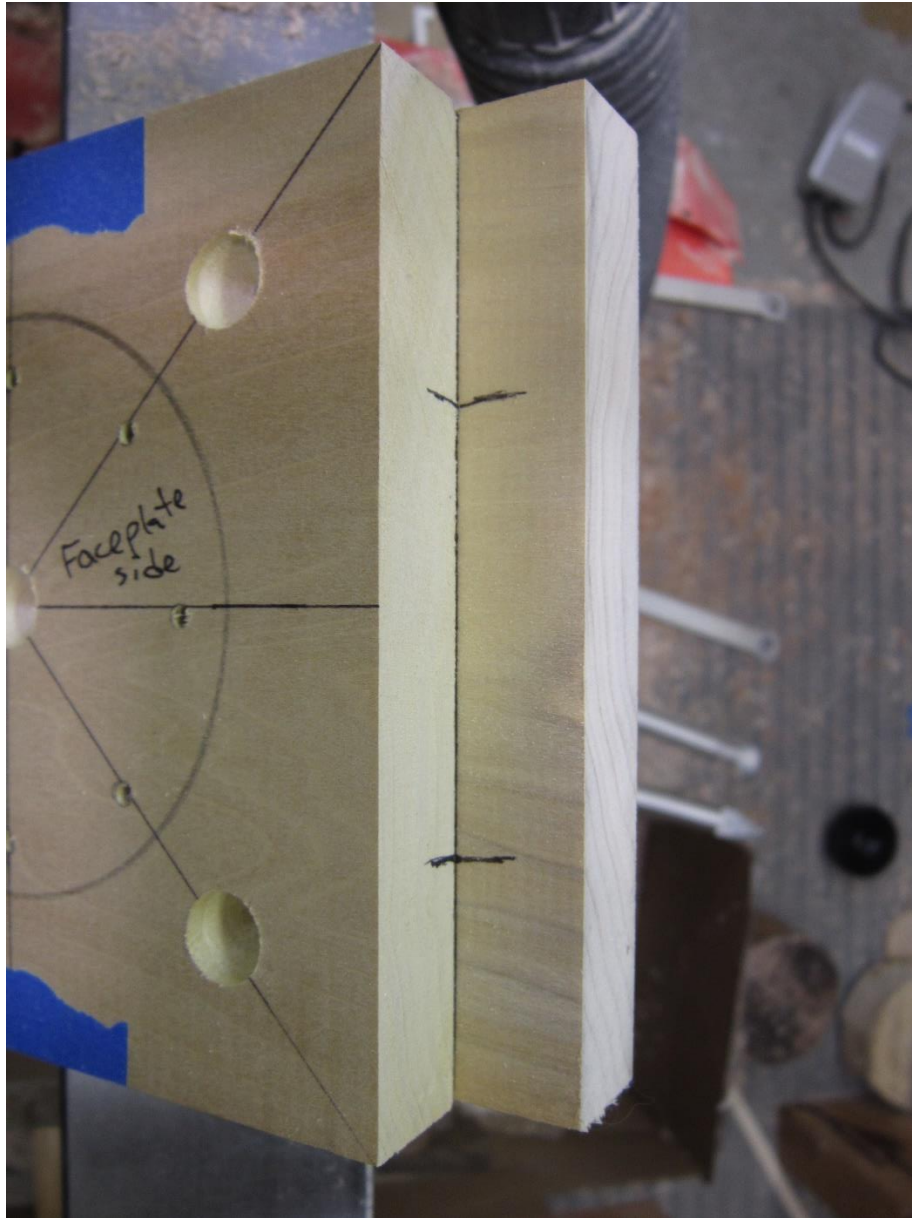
The faceplate board and workpiece mounting board taped together so they don't move, then drilled to give the "on center" alignment.
